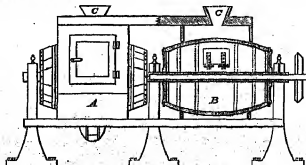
Glazing barrels. A, elevation, showing door of case; C, hoppers for loading; B, section through barrel (showing opening in dotted lines).
